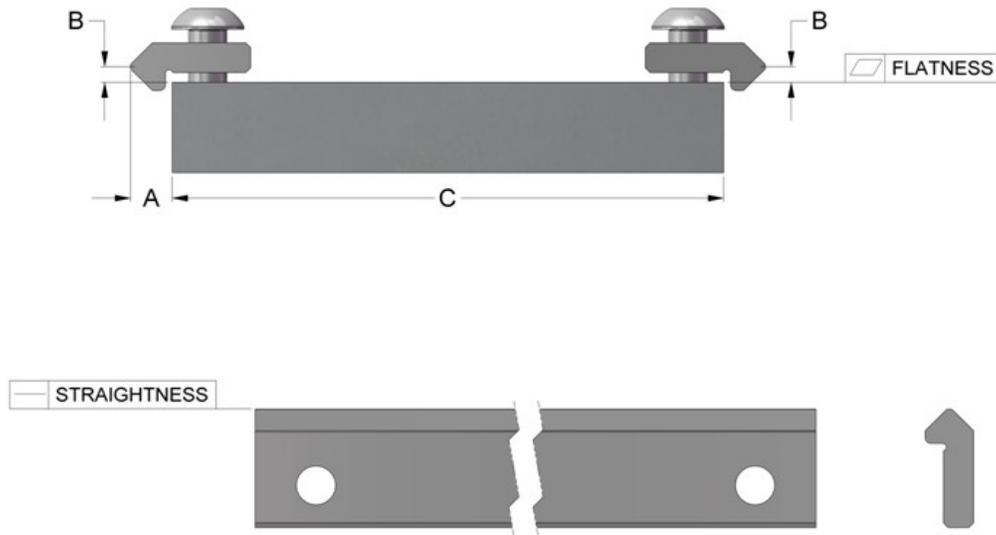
Stack-up of tolerances affects the location tolerances of steel v-rail assemblies
